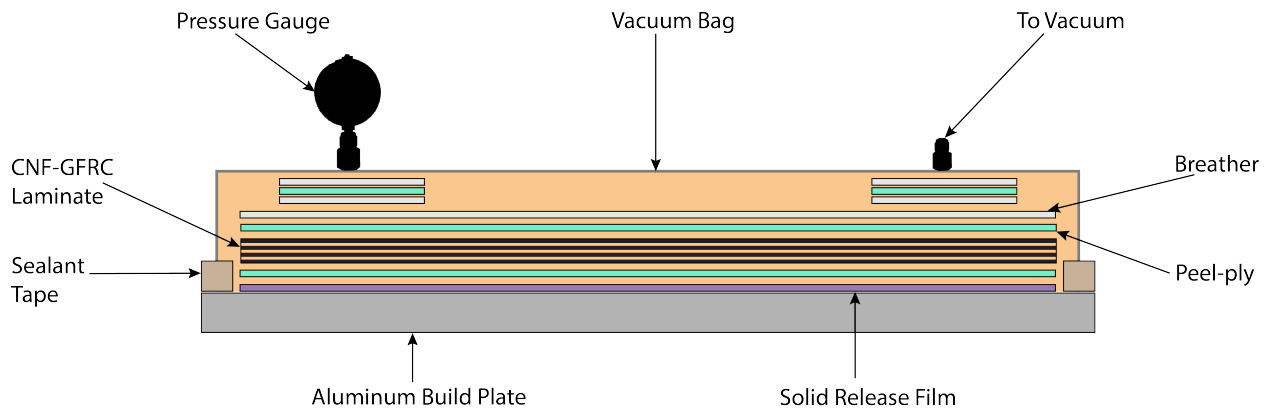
Cross-sectional view of the vacuum bag assembly used to manufacture the CNF-modified GFRC laminates.
